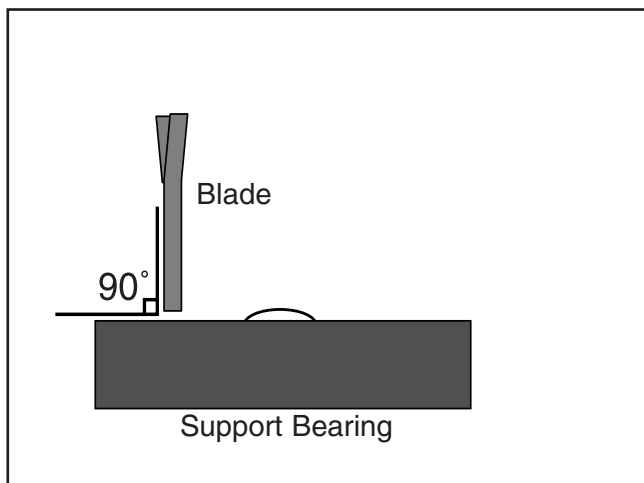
Illustration of blade set perpendicular (90°) to the support bearing face.
